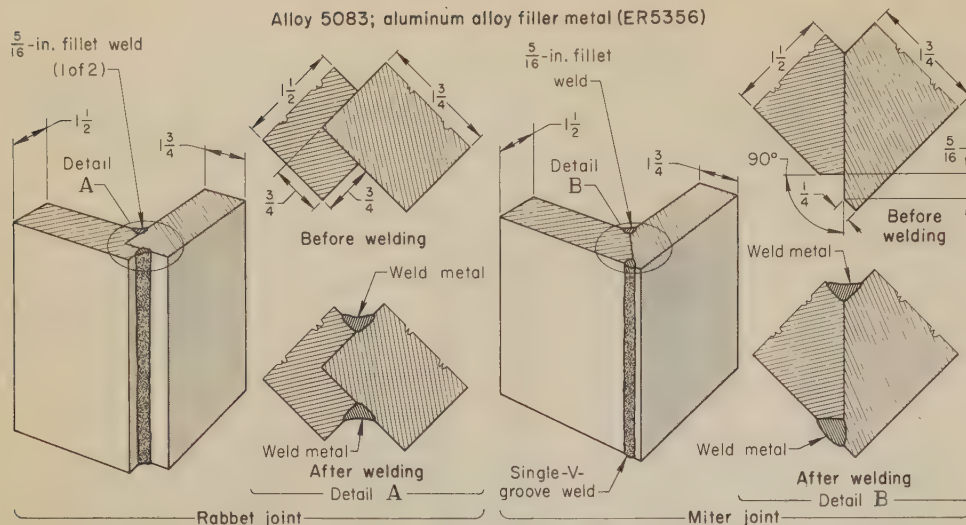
Corner joints with small fillet and groove welds made by gas metal-arc welding
